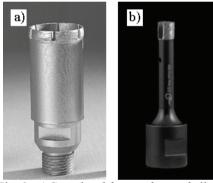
a) Sample of diamond core drill, b) Sample of diamond drill bit
